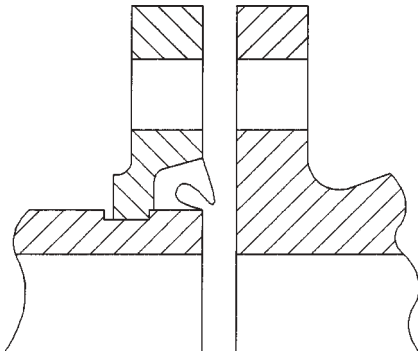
Modifying 300 PSIG flange adaptors for flat-faced flange application
